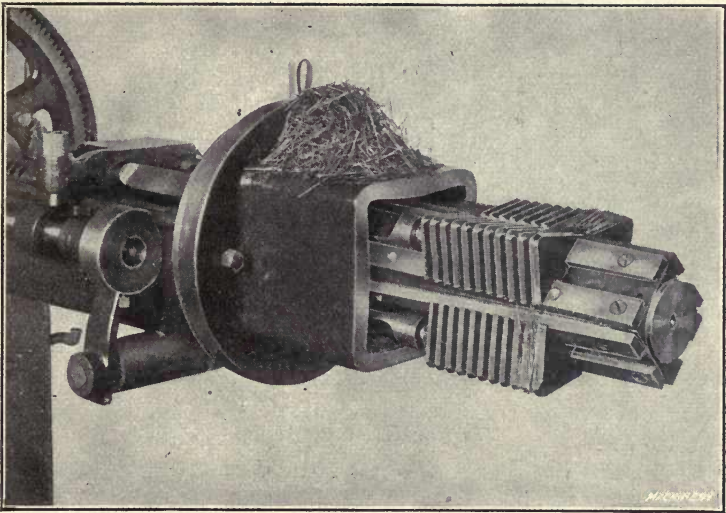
The Taper Broach used for Broaching the Steel Casting shown in Fig. 22
